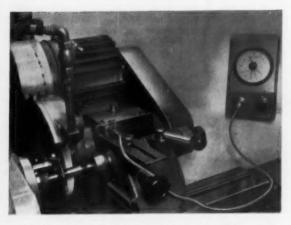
Microjet used for fine control of in-feed on grinding machine
